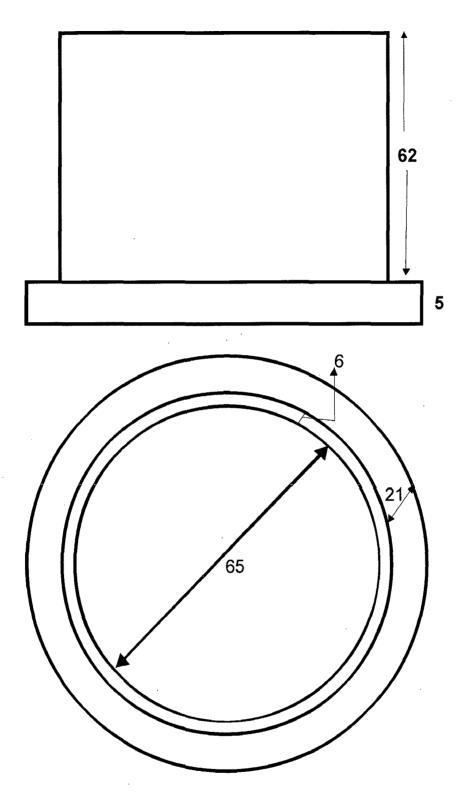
Details of Extrusion Assembly (dimensions in mm)
